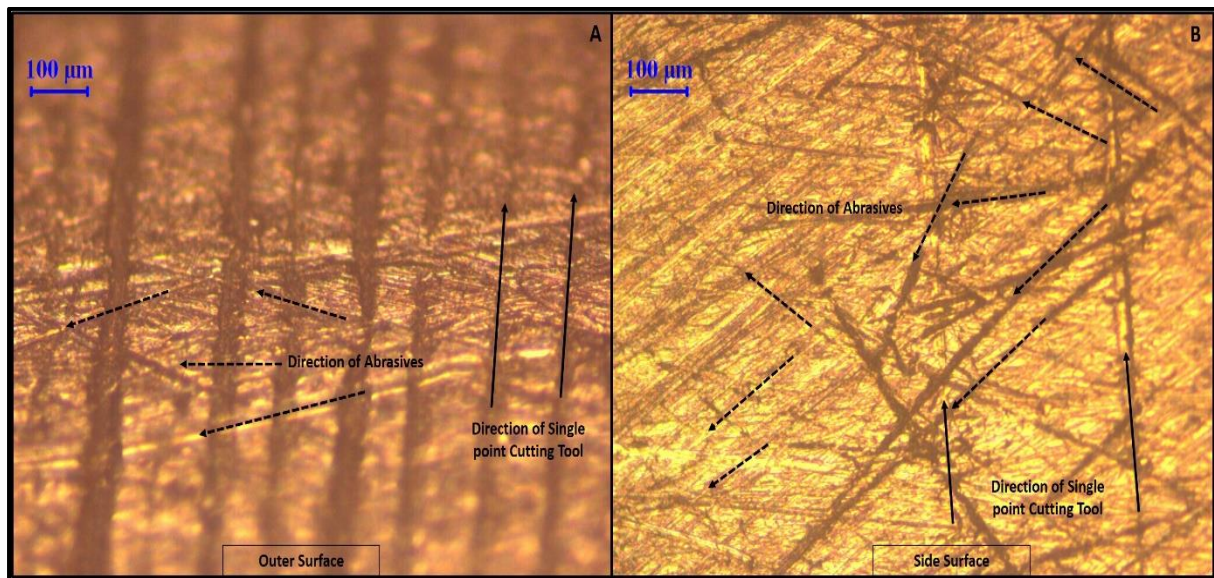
Leica microscopic images of finished workpiece at (a) Outer Surface, and (b) Side Surface at 10× zoom
